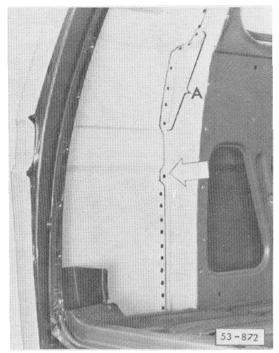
Welding in corner panel with gusset plate Areas: A, Arrow — MIG (plug)
